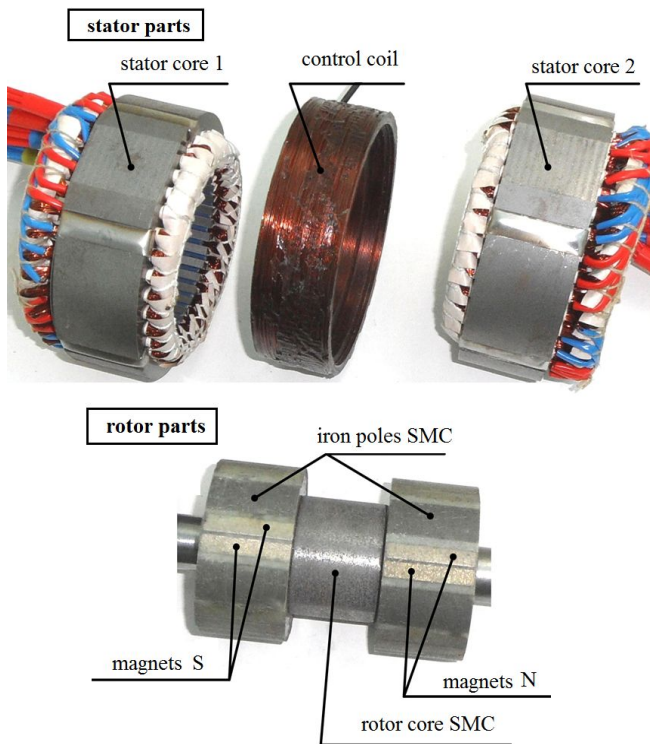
The stator and rotor parts of the prototype ECPMSM machine.
